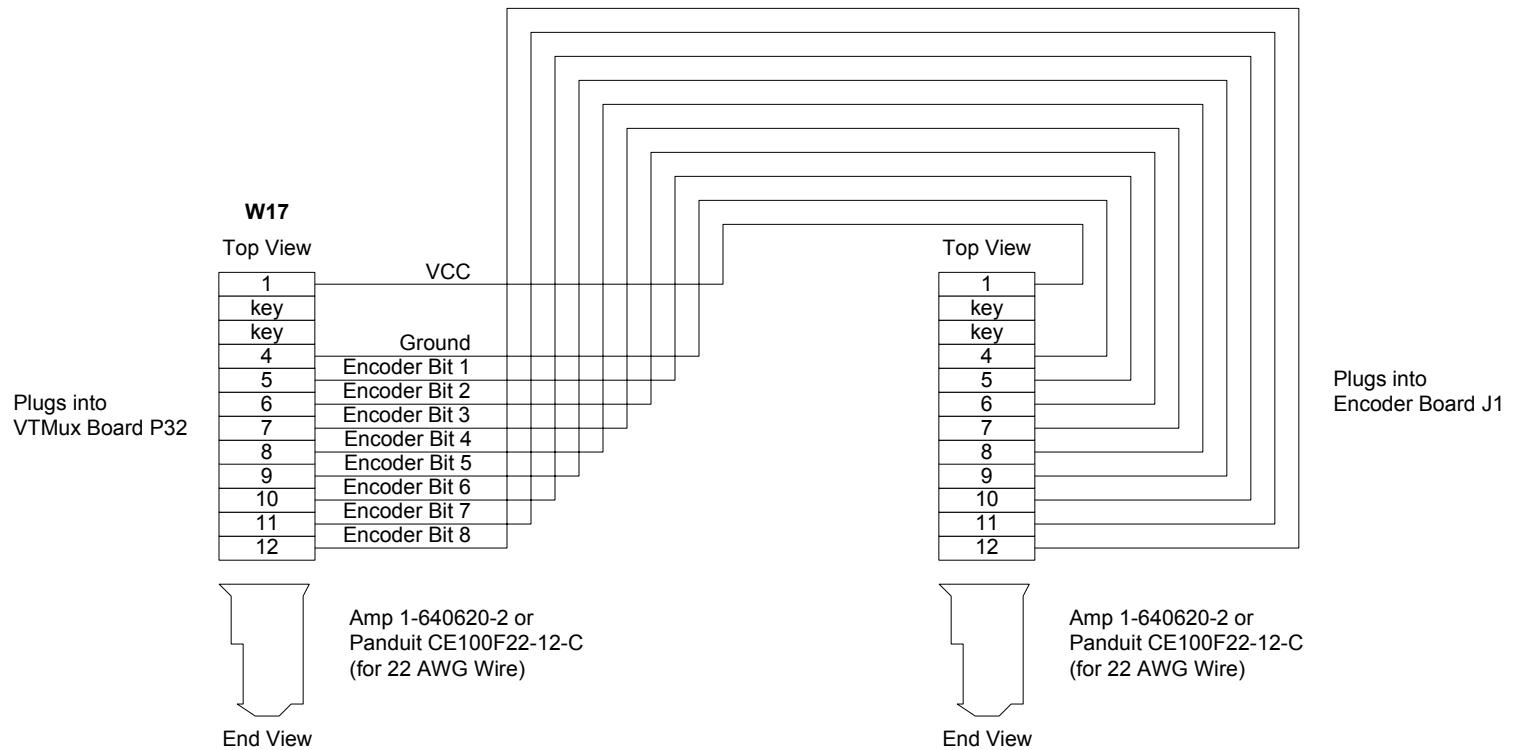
VTMUX BOARD P32 TO SPINNER SHAFT ENCODER
